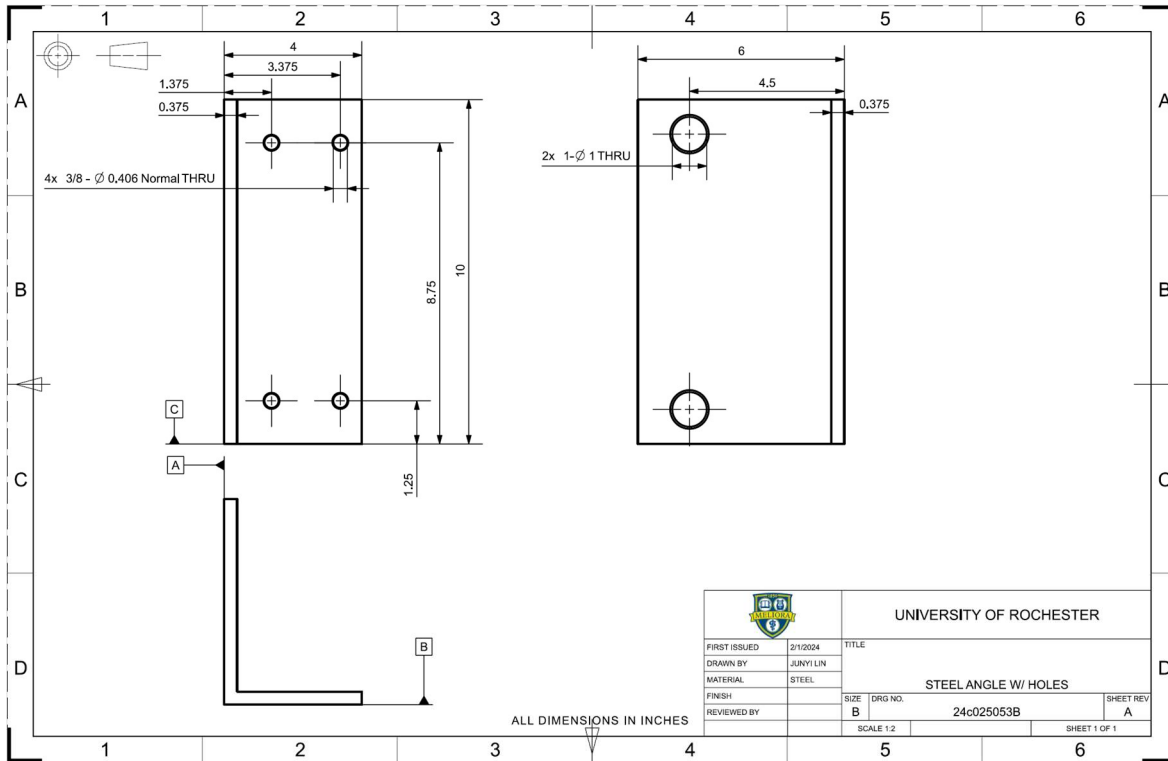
Engineering drawing of testing rig, steel angle with holes.
